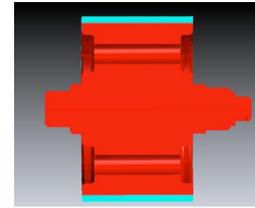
Variant F1₂₈ – One-piece shaft, with 6 holes + cylinder wear
